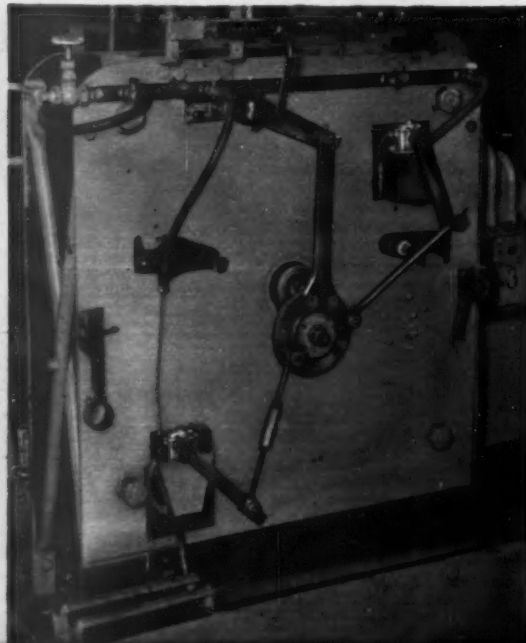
A machine with an eccentric and connecting rods, for testing the durability of piston-type dampers
